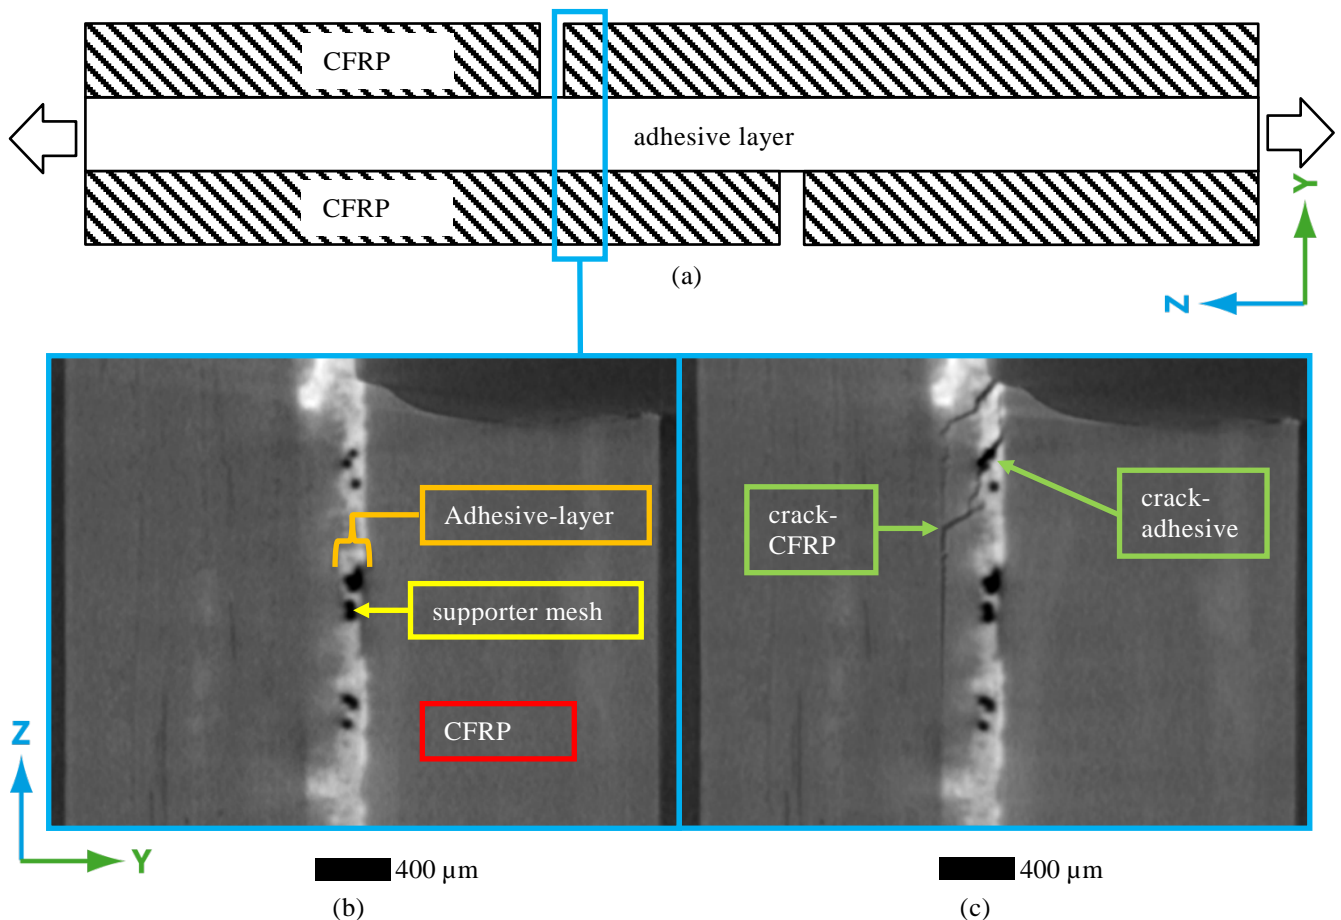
(a) sketch of specimen. XCT slice image (b) shows the adhesive bonded CFRP unstressed. At a certain load (c) a crack trough the adhesive layer and the CFRP matrix is visible.
